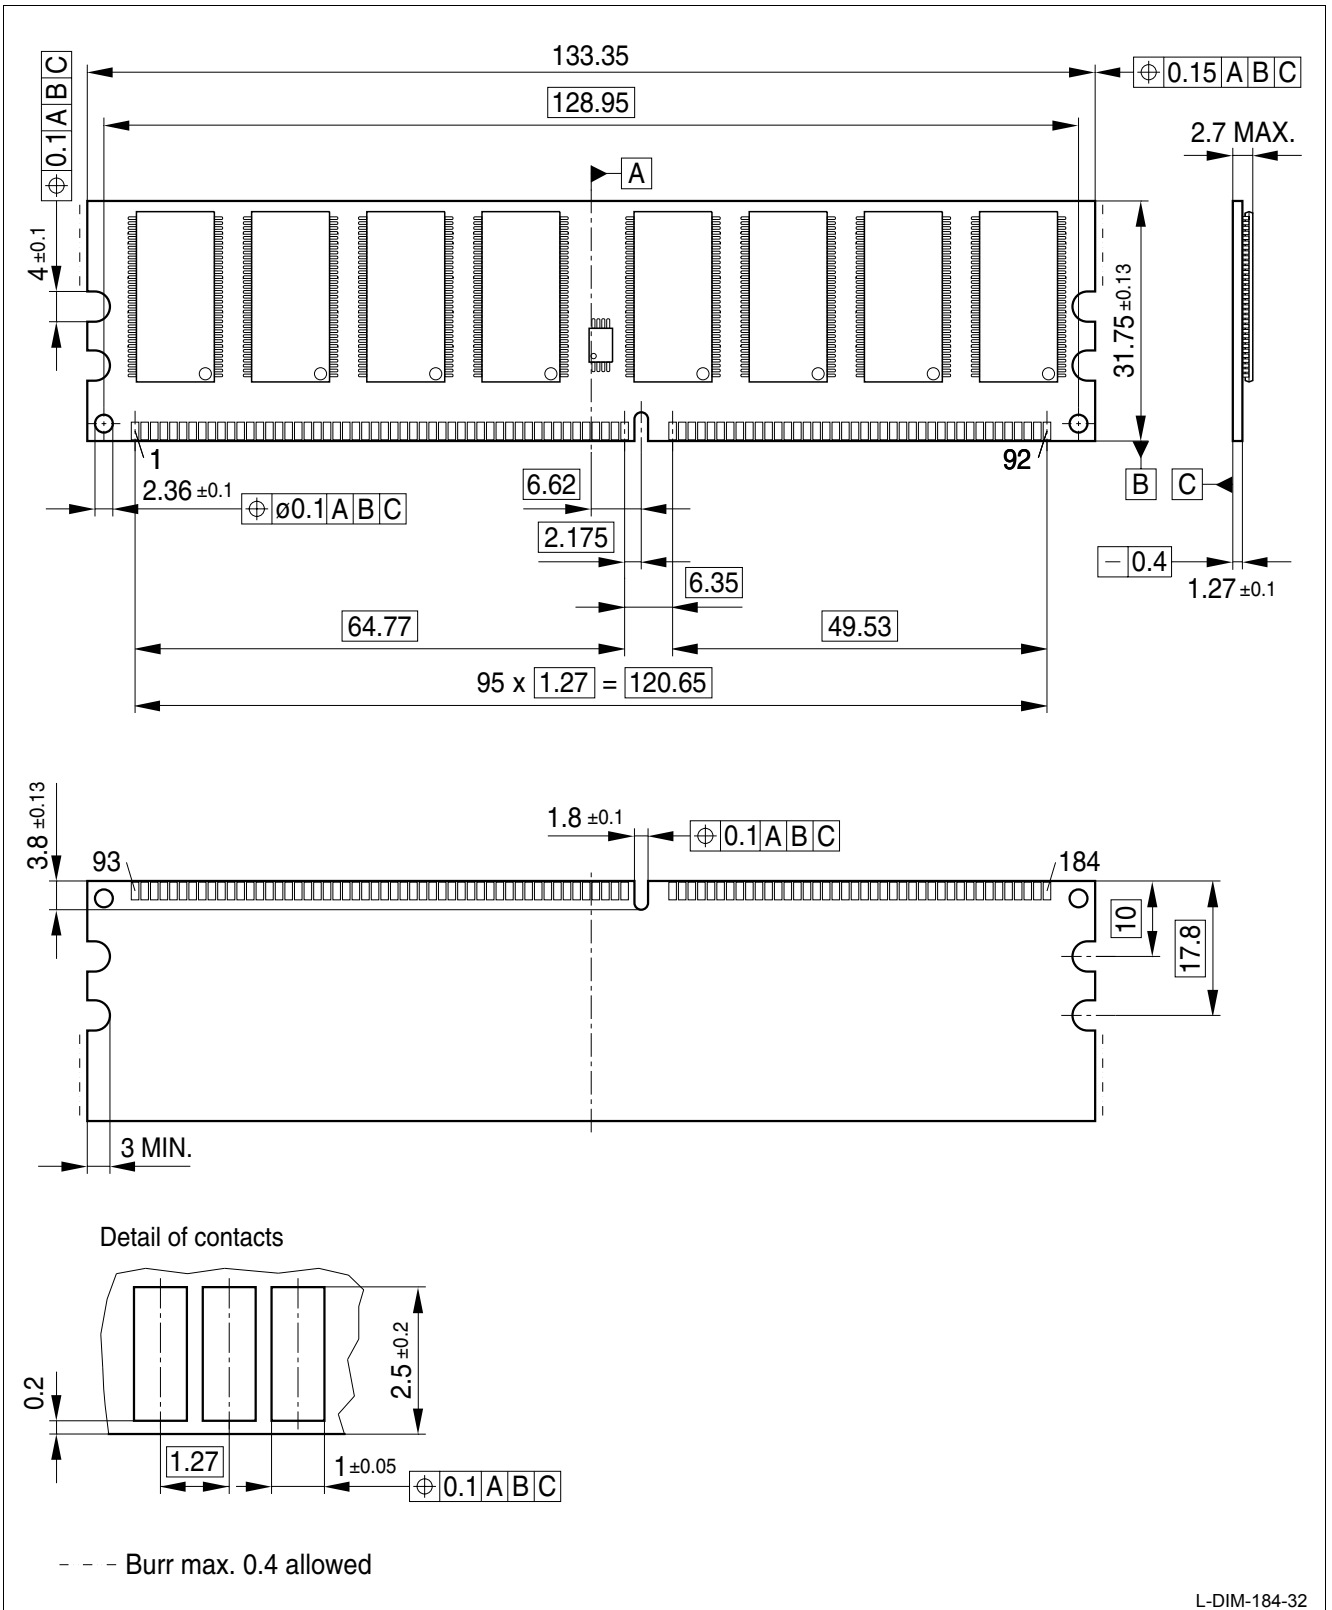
Package Outline - Raw Card A 256 MByte, 1 Rank Module
